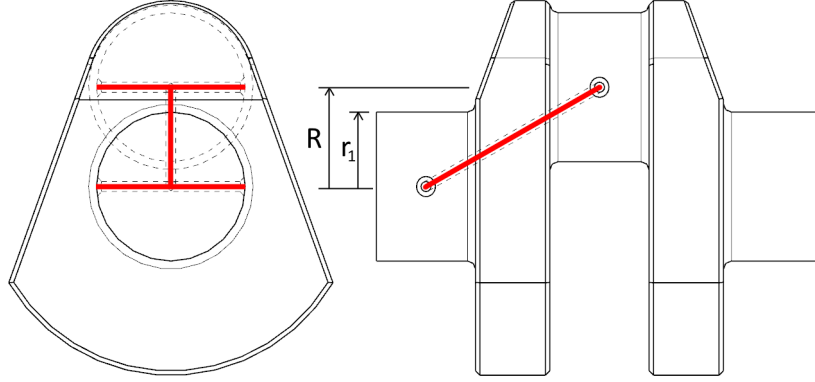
Crankshaft axial crosssection with the oilchannels in red. (NX CAD model)
